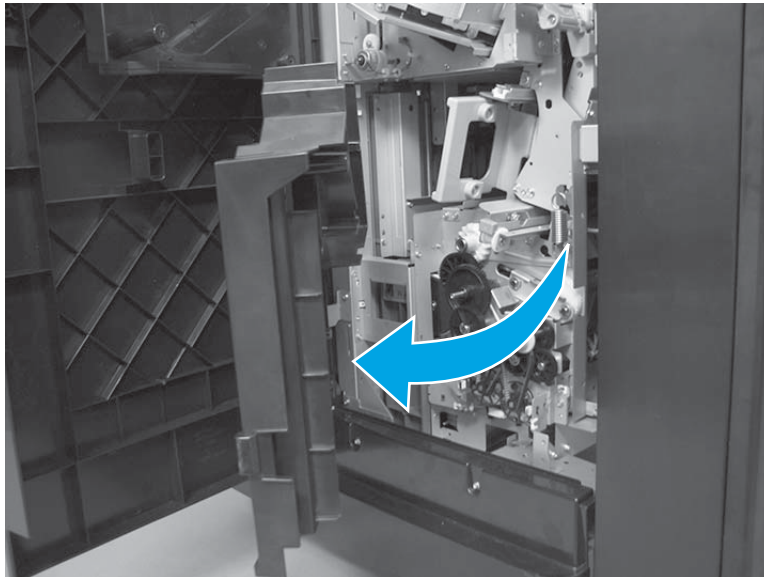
Move the inner lower cover out of the way (3 of 4)
